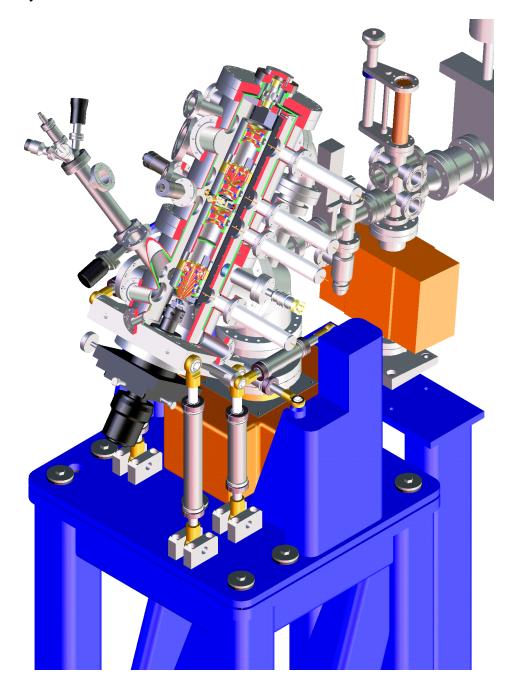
Three-dimensional engineering drawing of the PEEM microscope.
